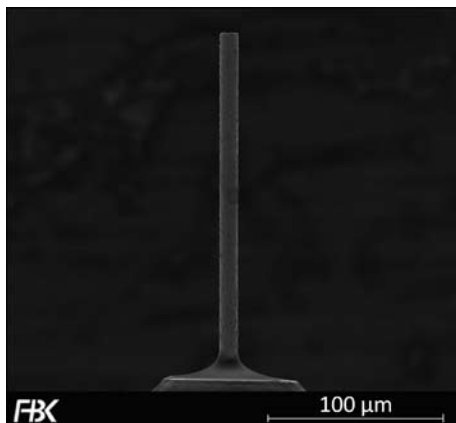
A shank with a diameter of 10 µm and a length of 200 µm to be used as a micro-EDM tool to make a centric hole in a micro pencil grinding tool (Figure 1b).
